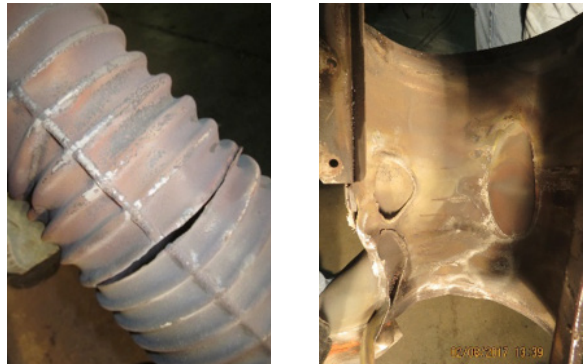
Photographs of a cracked muffler and exhaust deposits in the muffler shroud.
